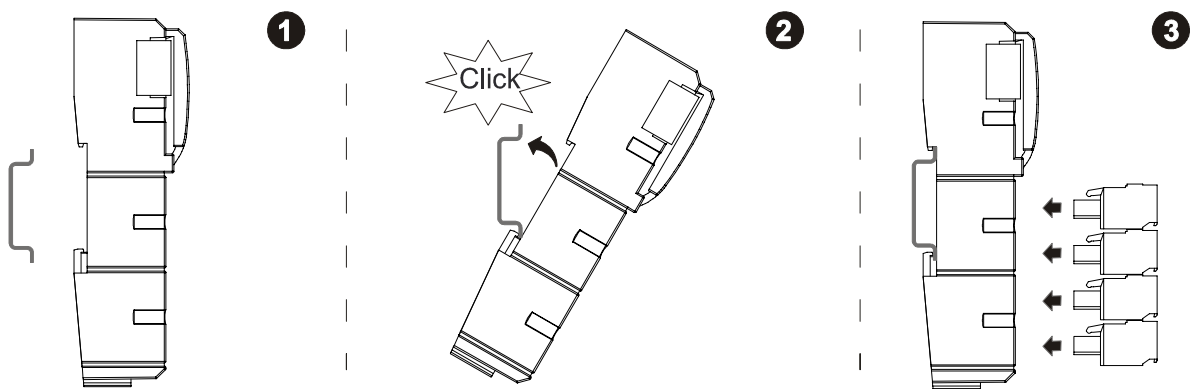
Mounting IMPACT20 modules on DIN mounting rails
